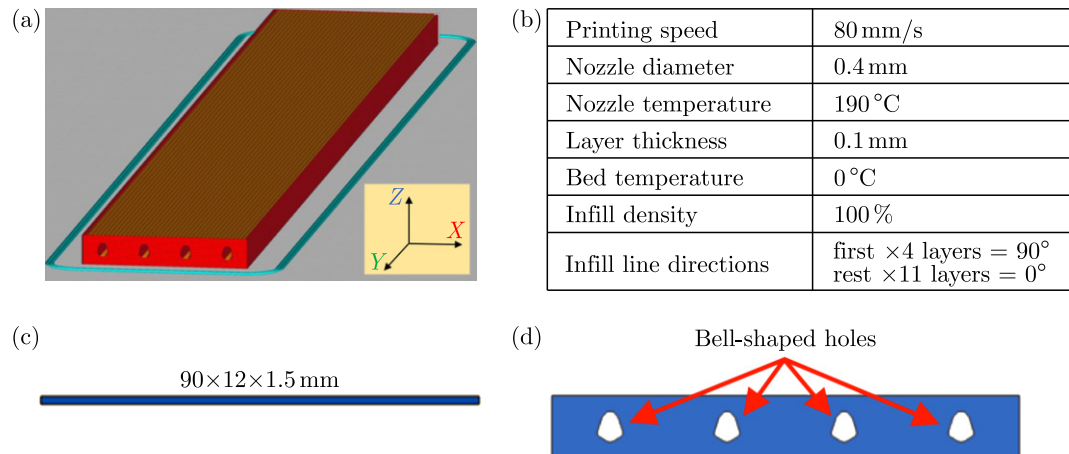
Sample design: (a) isometric view; (b) printing parameters; (c) lateral view, sample dimensions in millimeters, scale 1:2; (d) front view, bell-shaped holes, scale 1:16.
